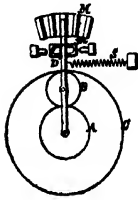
Device for Regulating the Unchecked Speed of Trains on Telfer Line.
